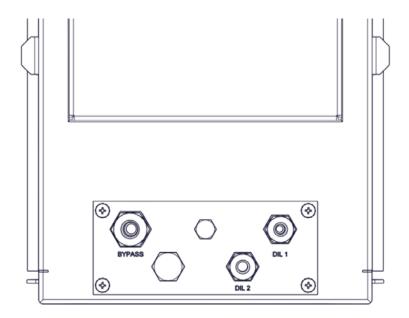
Lower View of Probe Monitor Connections (Rear)
